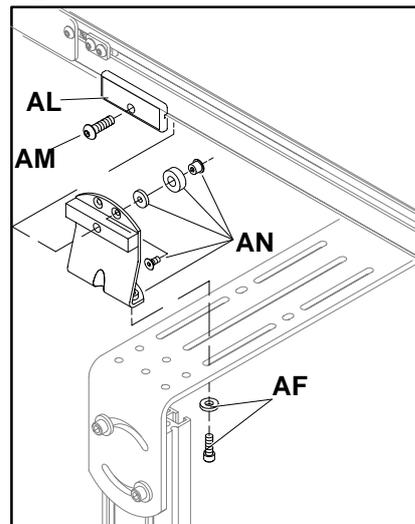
2100 Series Cleated-Belt Conveyor Mounting Bracket with Return Belt Roller Assembly (3100 Series Components Similar)
